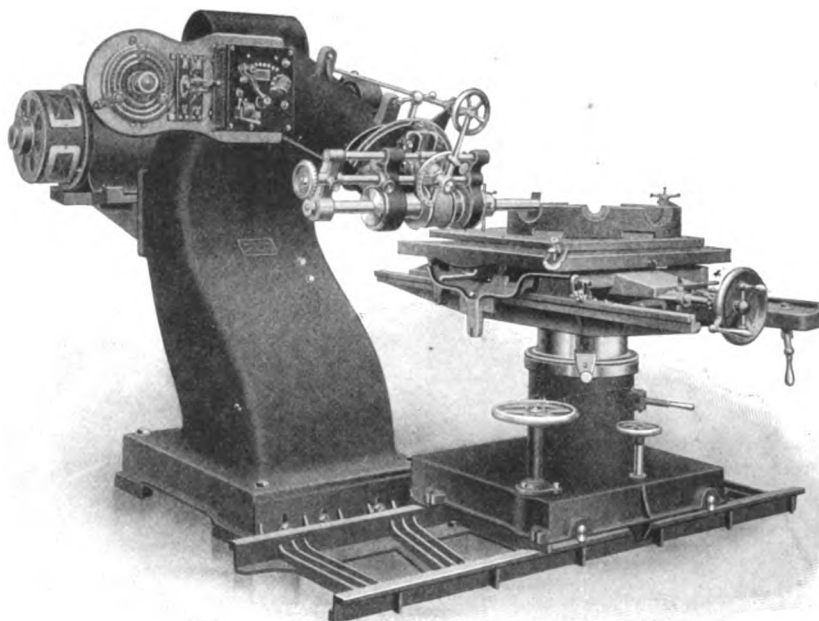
THE WADKIN ELECTRIC WOOD-WORKING MACHINE.
